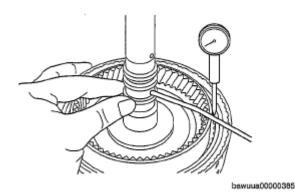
Applying Compressed Air And Measuring C1 Clutch Piston Stroke. Courtesy of MAZDA MOTORS CORP.
